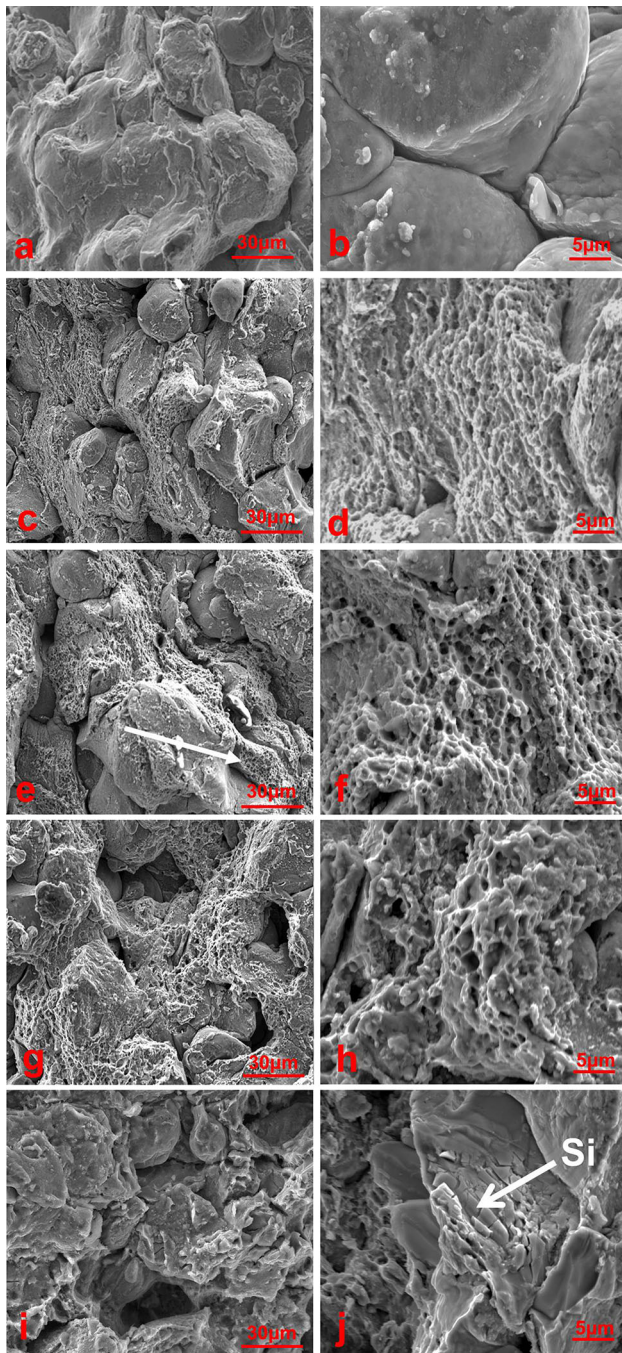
Fracture surfaces (two magnifications) of tensile specimens of A380 deposits under as-deposited and heat treatment conditions
